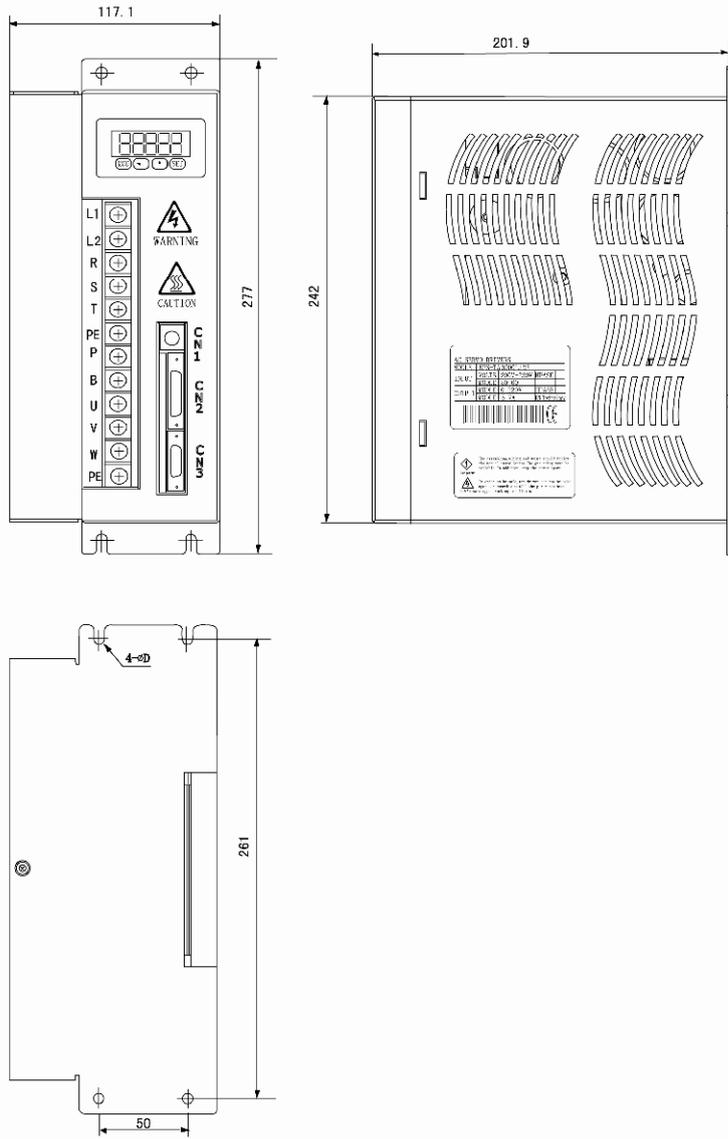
EPS1—500 servo motor driver dimensions (Unit: mm)
